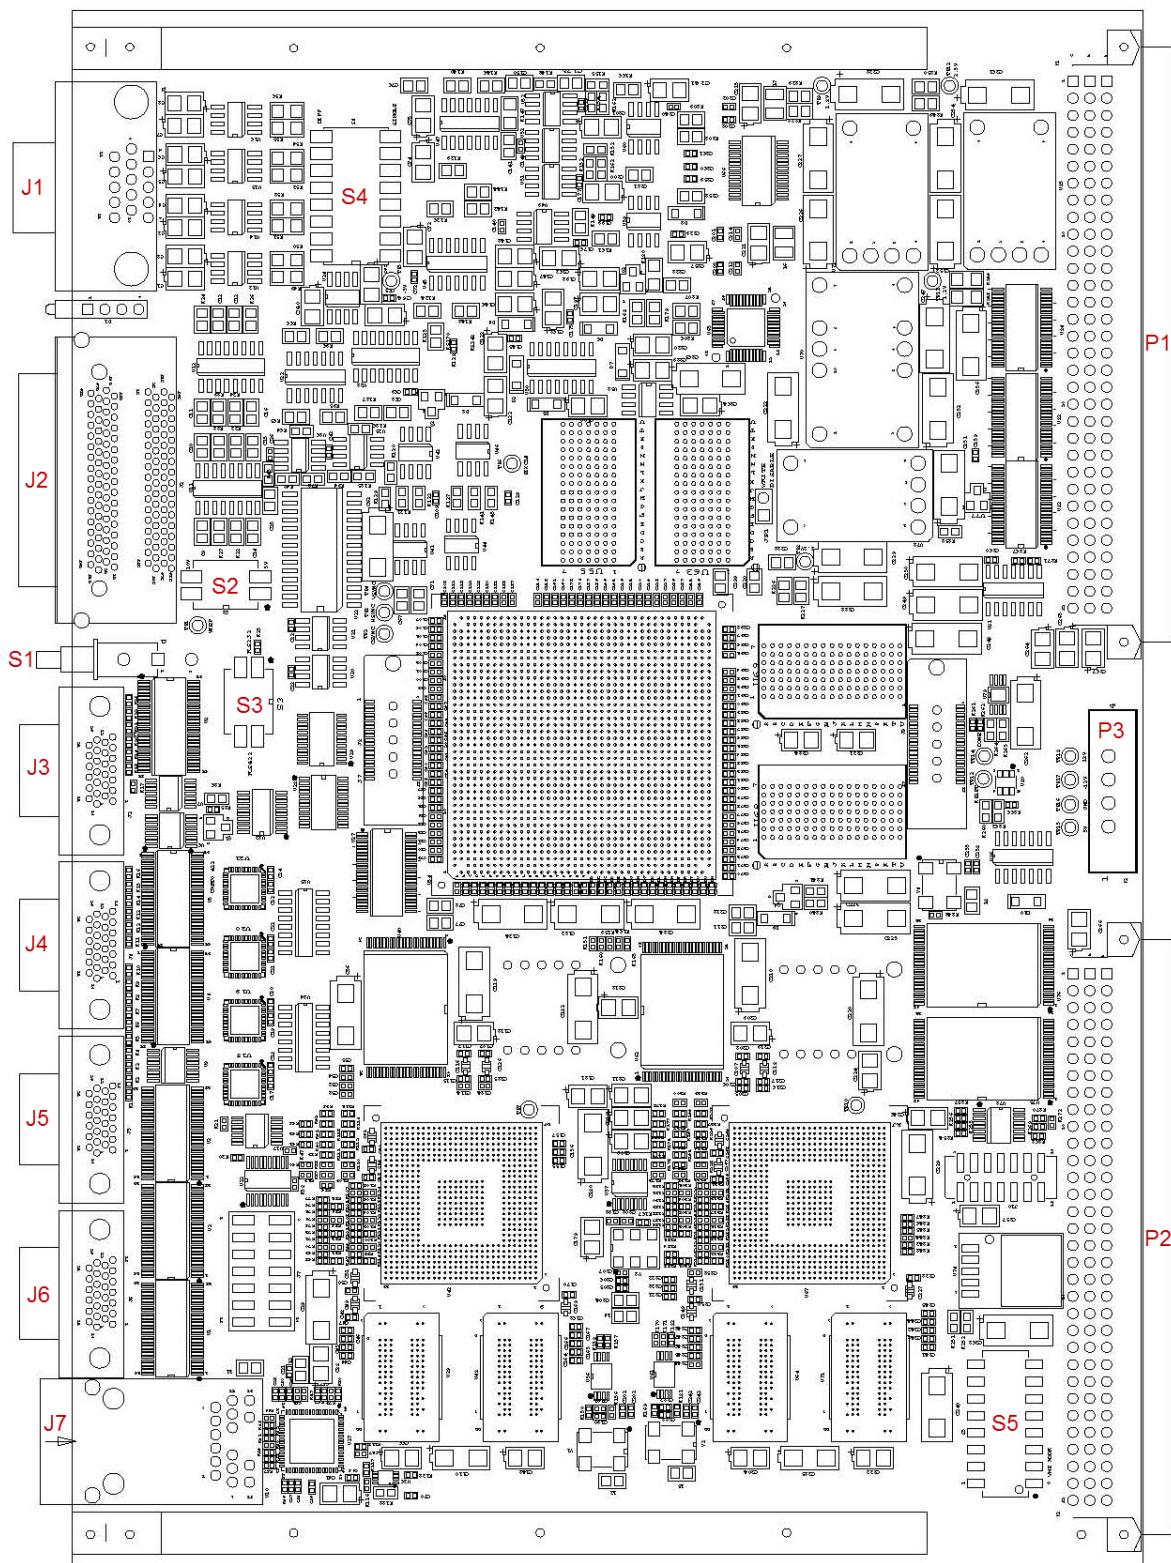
Model 7005-CL/7006-CL R2 VMEbus Tracker Board Top Assembly
